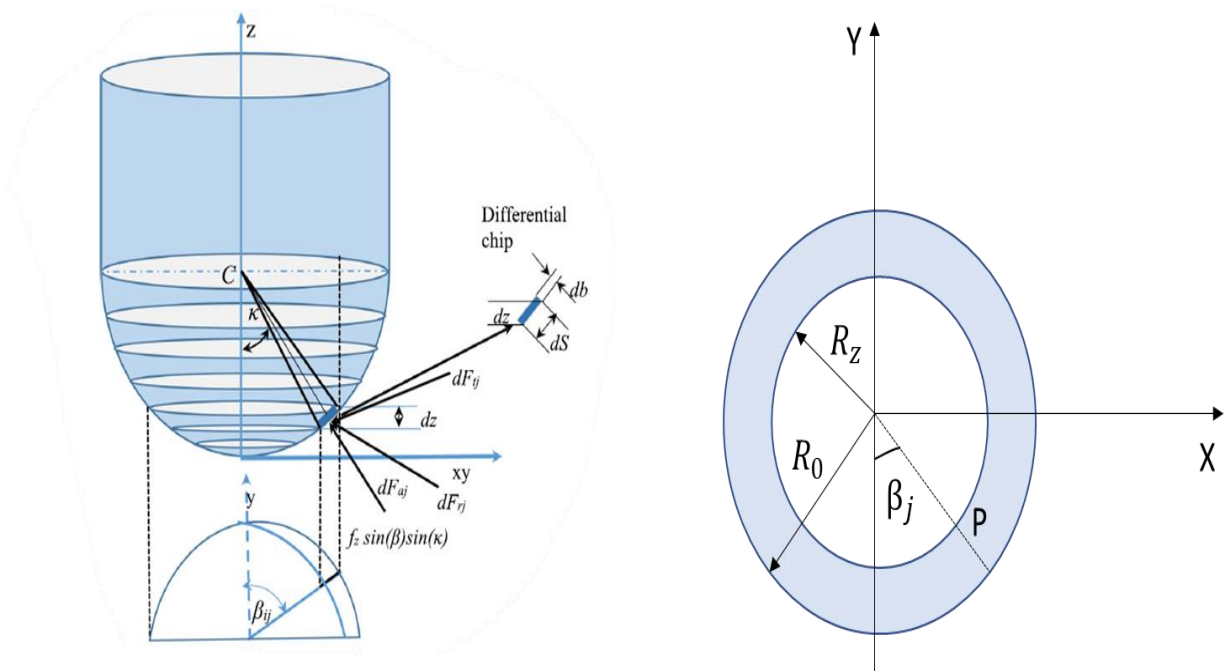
Front view of the discretized cutter and top view with position angles
